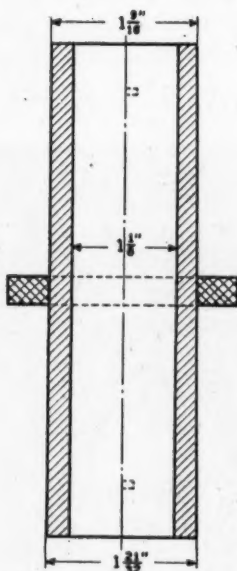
Split specimen tube with sliding ring, tapered surface and hardened inside surface.
